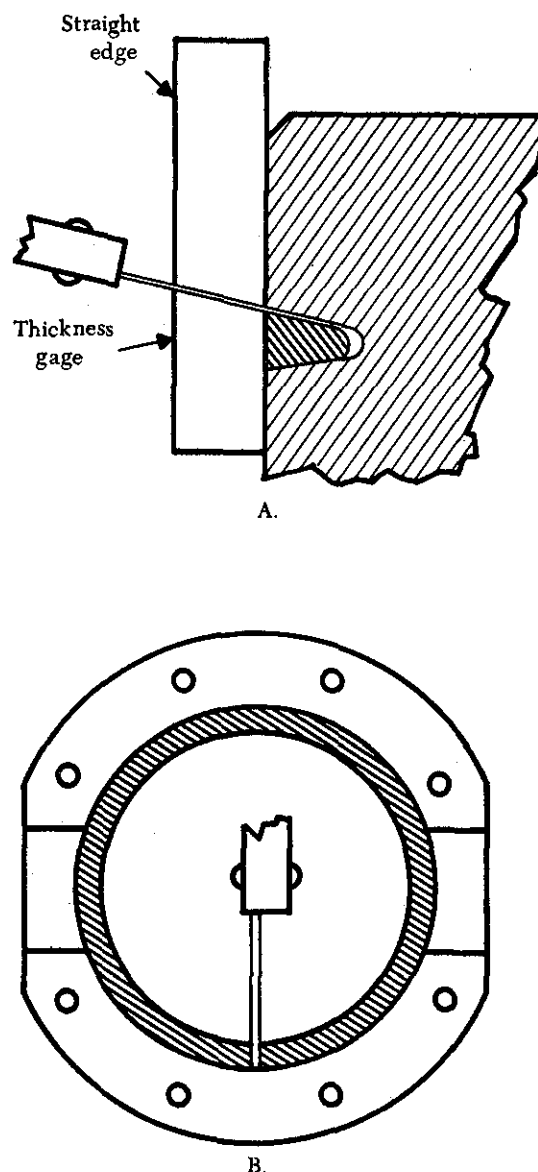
(A) Measuring piston ring side clearance and (B) end gap.
